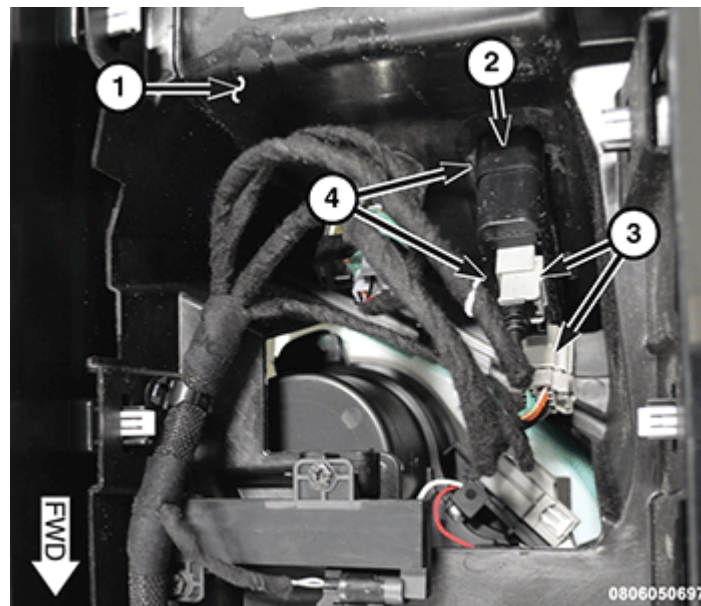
Rear Storage Bin, Media Hub Housing, Wire Harness Connectors & Latch Tabs
